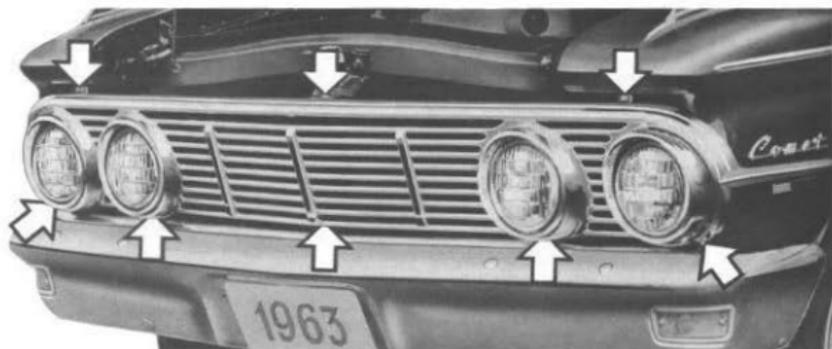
1963 Falcon Grille Retaining Bolt Locations
